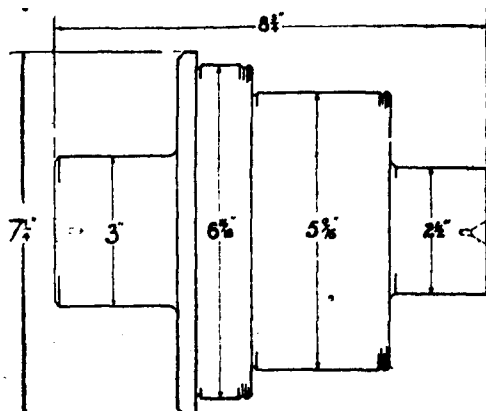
A batch of three arbors similar in shape but varying in dimensions are economically produced on a Herbert No. 7 Combination Turret Lathe.
